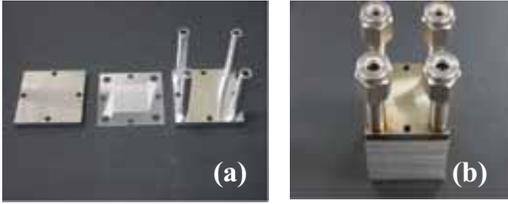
Photographs of (a) a microchanneled stainless steel plate and top and bottom covers and (b) assembly of microchanneled stainless steel plates by vacuum brazing.
